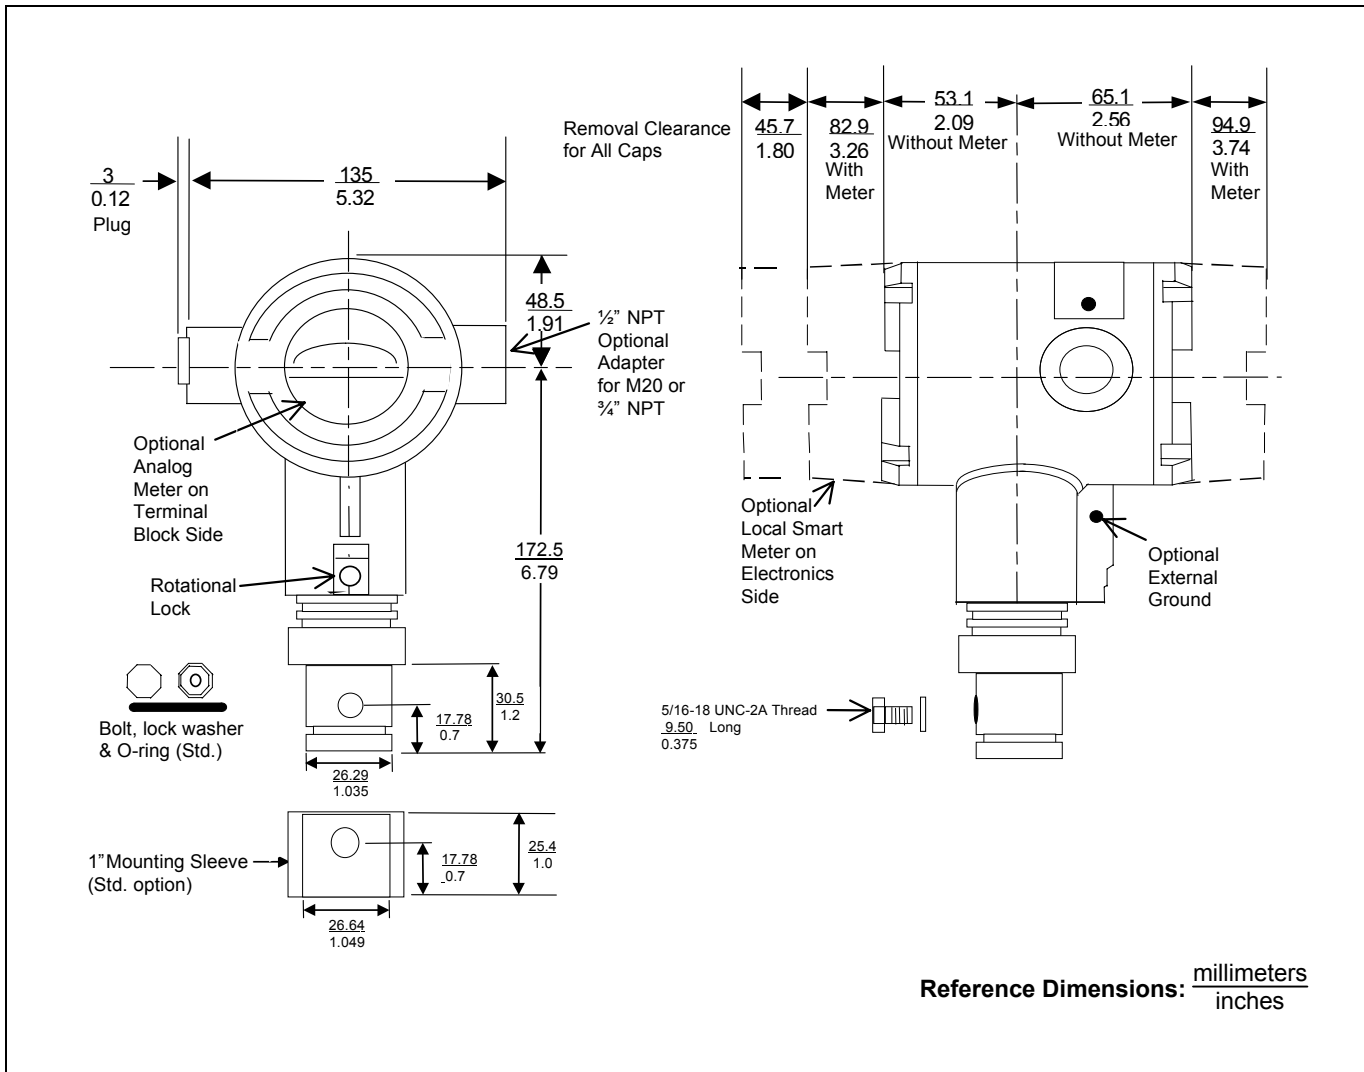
Typical Mounting Dimensions for 1" Flush Mount Transmitter
